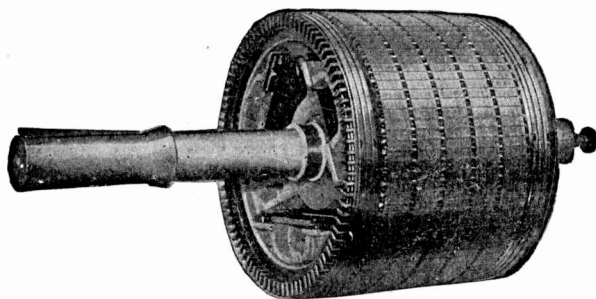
Rotor with Definite or Polar Winding with Starting Resistance Inside Core
